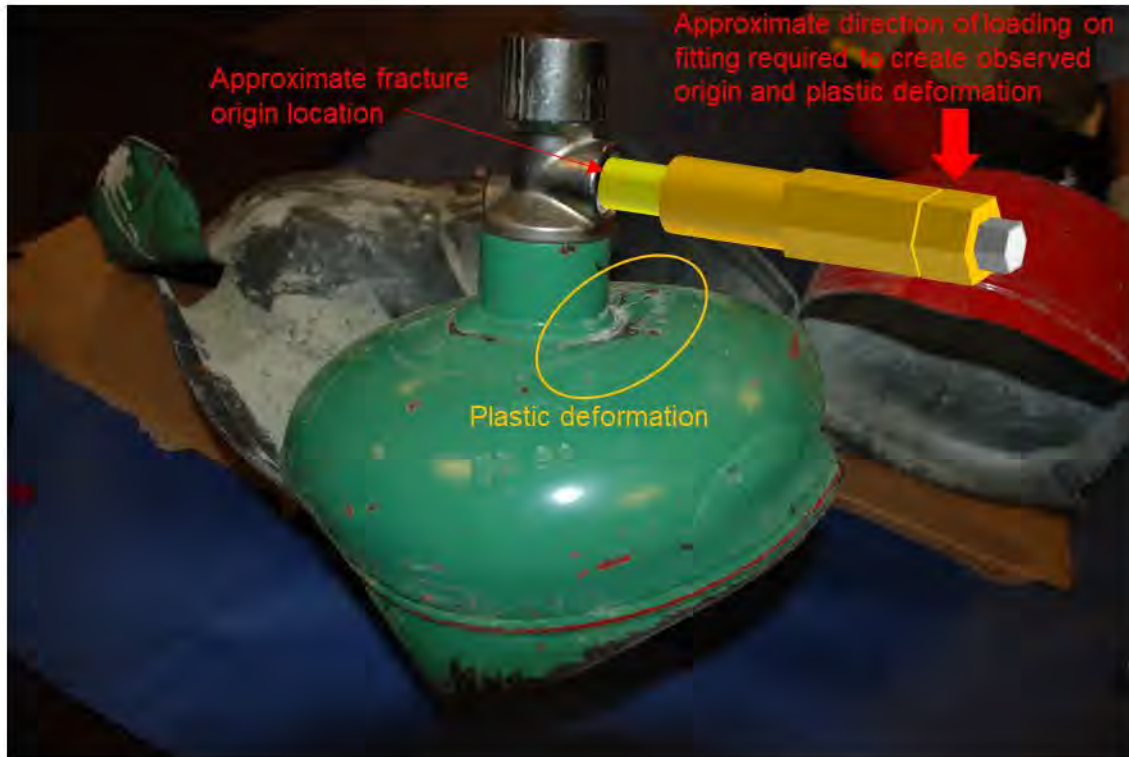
A diagram of the loading condition/direction that caused the pipe nipple to fracture within the threaded region, with the pipe fitting prior to fracture schematically depicted. Both the fracture initiation location within the threaded region, and the gross plastic deformation observed on the cylinder are consistent with a load being applied downward on the pipe fitting. Note: schematic of fitting is not to scale but enlarged to illustrate approximate loading direction.
